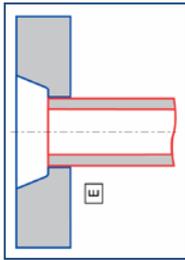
Proven weld preparations of the tubesheet for recessed tubes
